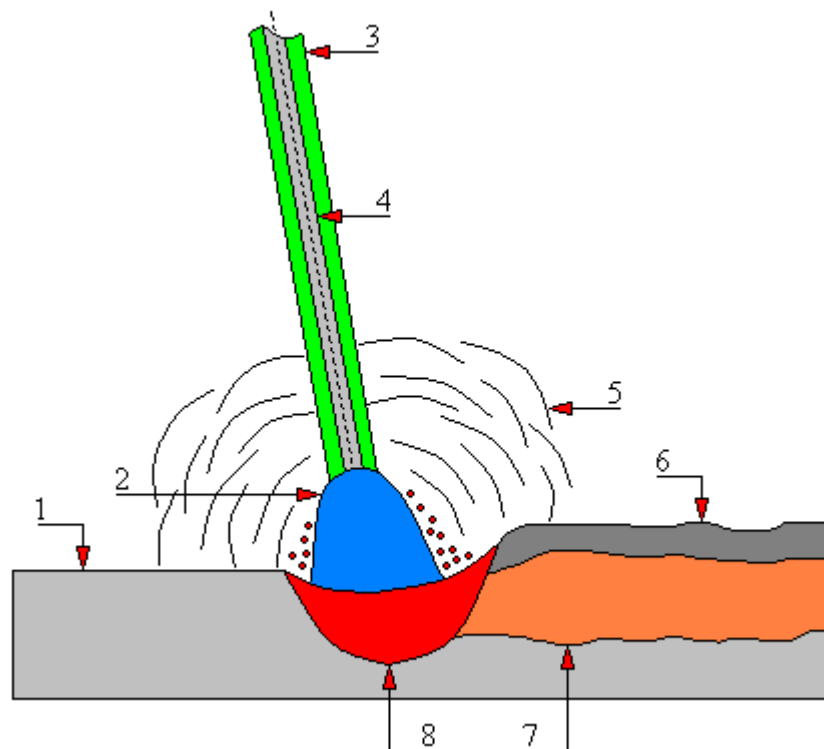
The process of electric arc welding with a coated electrode
